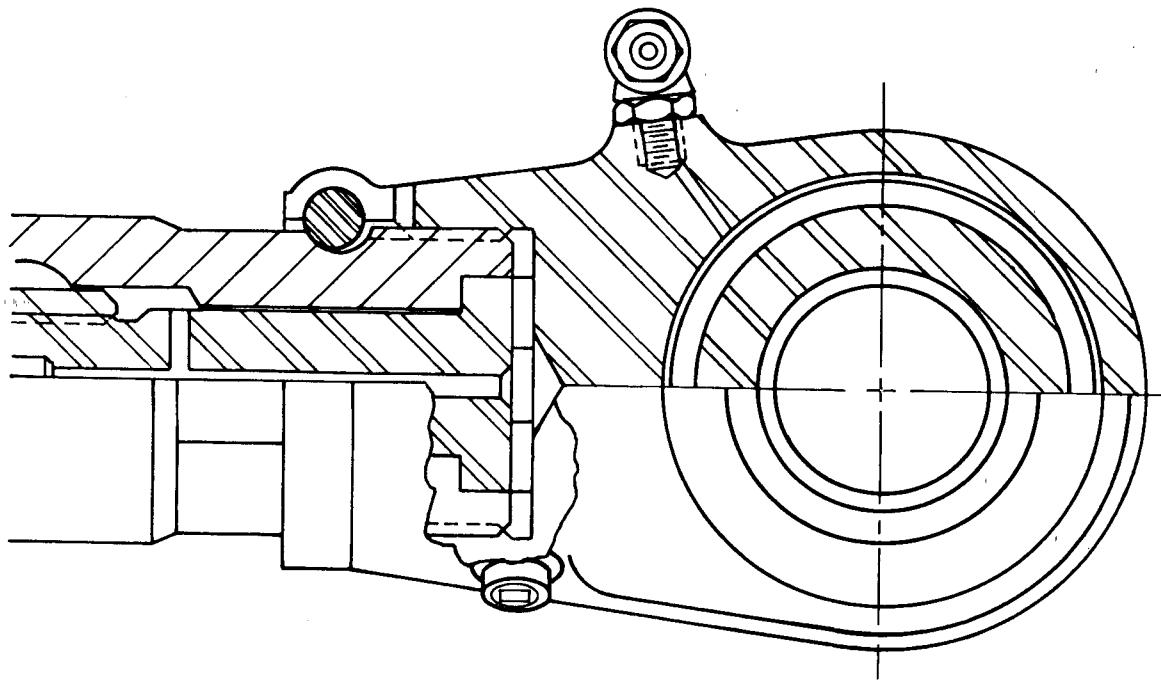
DC-10 OUTBOARD ELEVATOR ROD END EXTERNAL ROD THREAD
